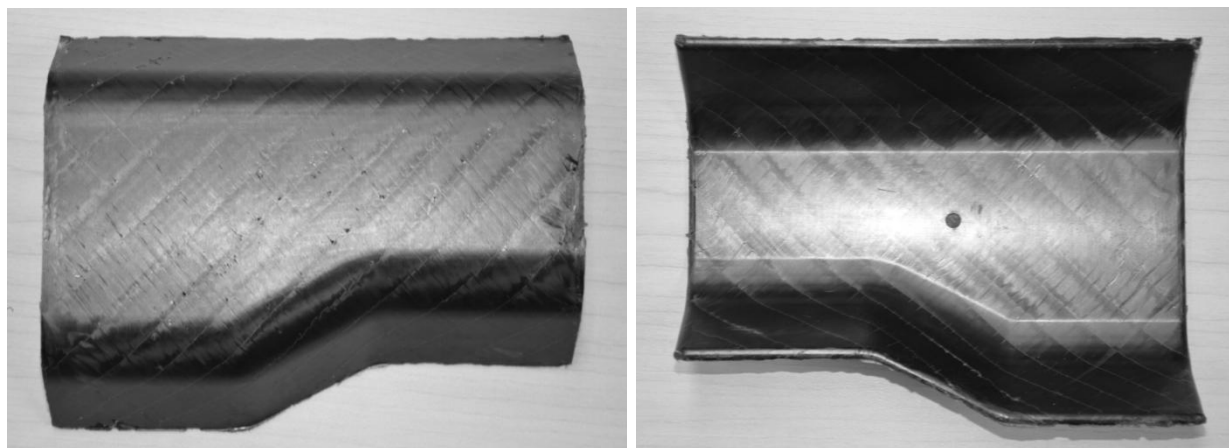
Demonstrator PMC component: top view (left) and bottom view (right)
